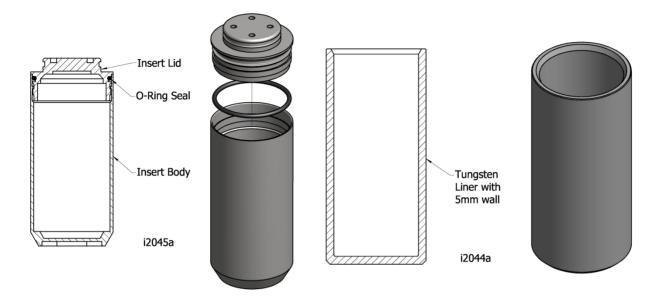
Shielding insert HS-50x85-SS– Design # 4081 and Tungsten liner
